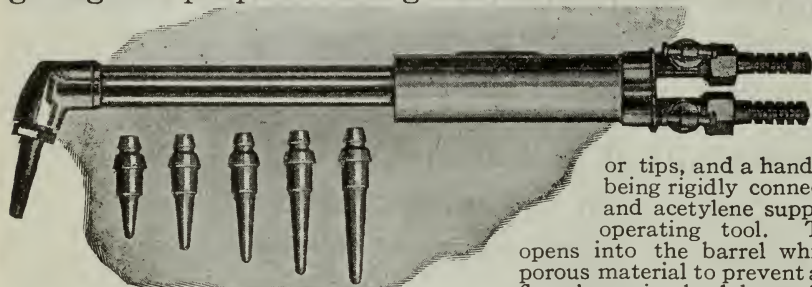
,490.—Davis-Bournonville oxy-acetylene blow-pipe, or "torch." It consists of a head piece for receiving the mixing nozzles
